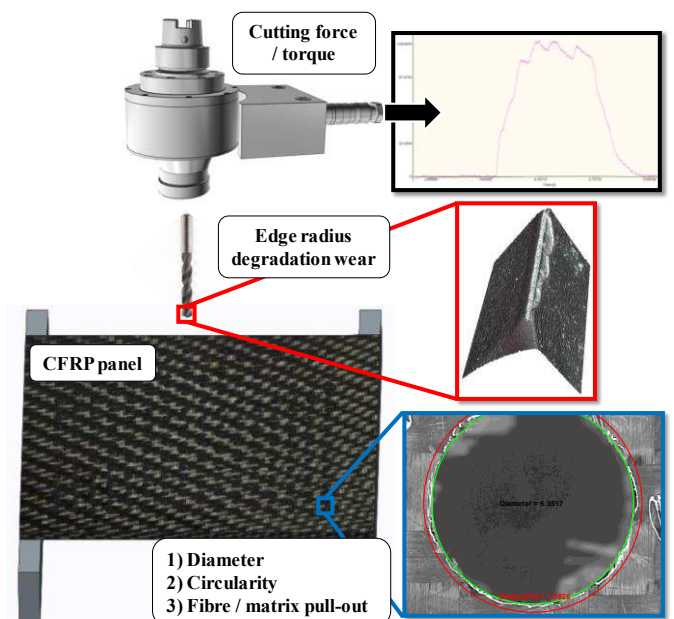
Experimental setup with CFRP panel, drill and measurements taken during tool life experiments.
